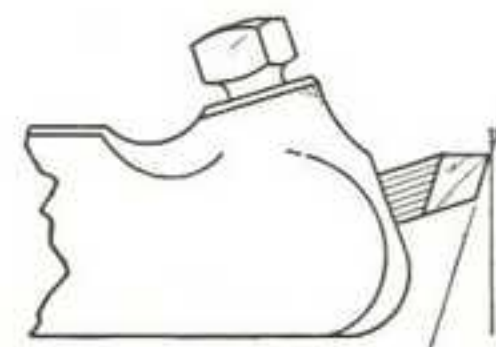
Side View of Lathe Tool Cutter Bit Ground for Cutting Screw Threads
